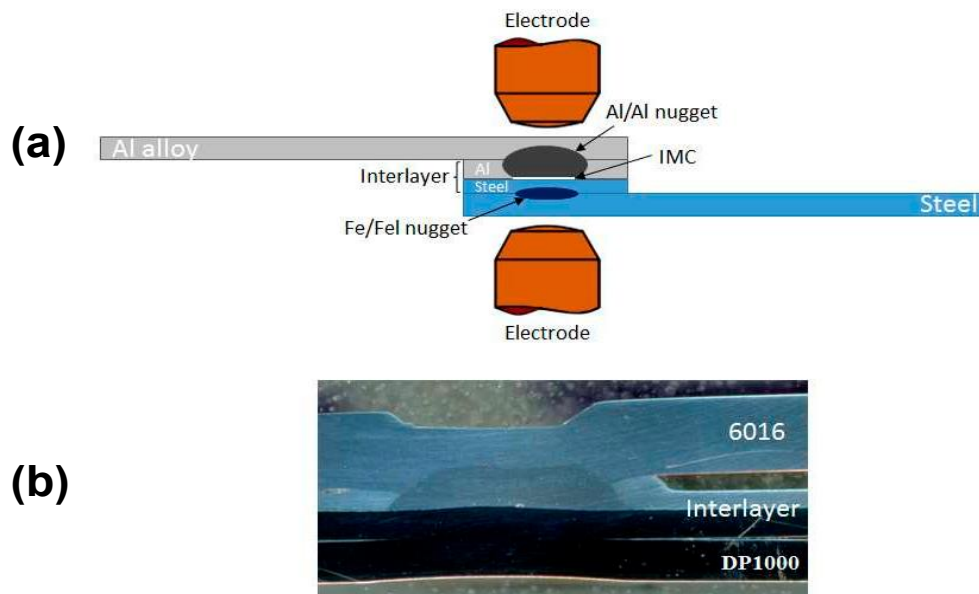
(a) Schematic of Bimetallic spot Welding (b) Section with bimetallic interlayer 40 % Al alloy and 60% steel [20]
